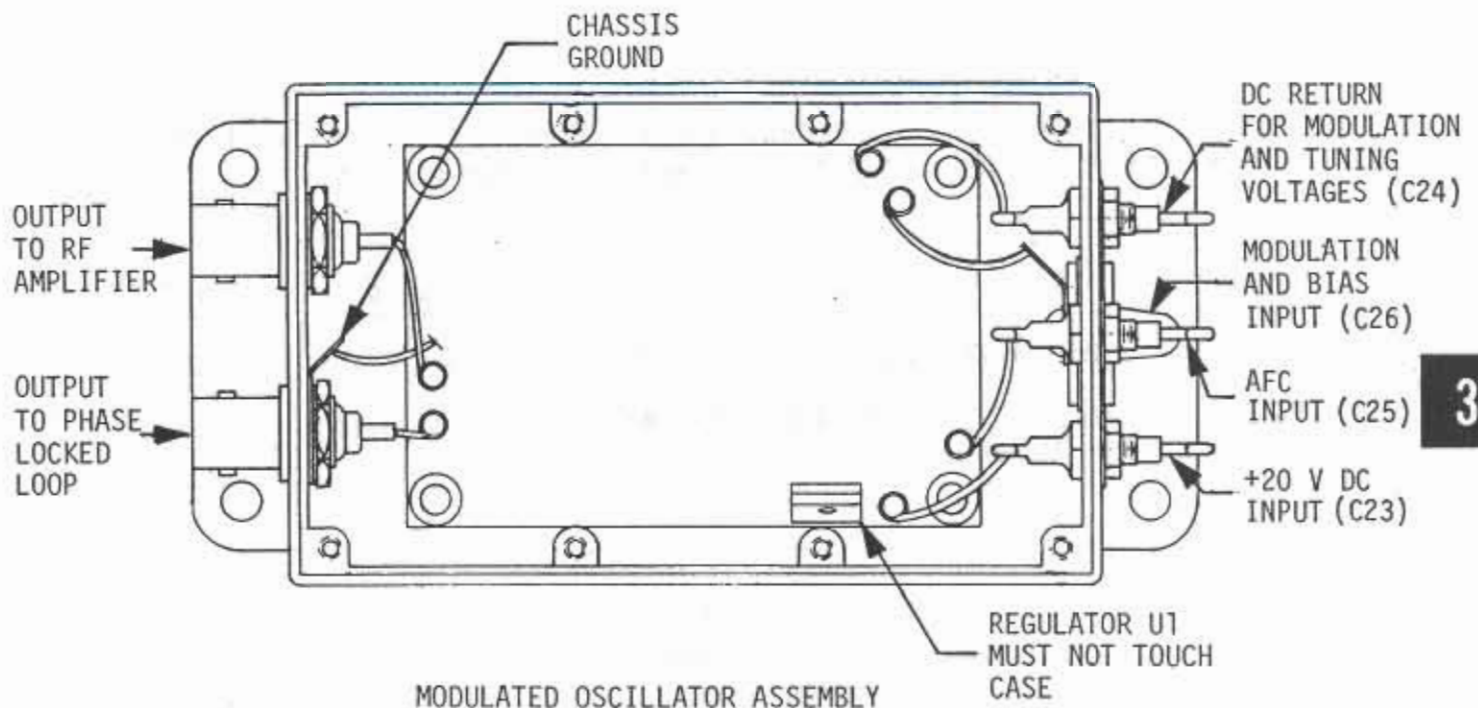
MODULATED OSCILLATOR ASSEMBLY - B917-0019
